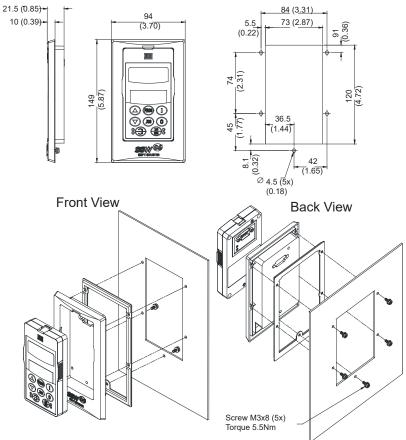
Dimensions in mm (in) and how to install the Keypad in the panel with frame
